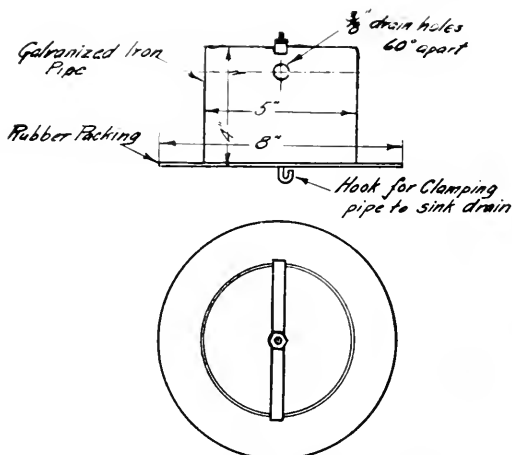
Sink Overflow Arrangement for Washing Prints.
